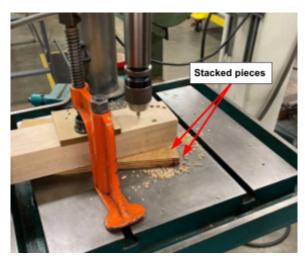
Match drilling example on a drill press. Both parts are identical, and used symmetrically on the device. Multiple clamps keep the parts aligned with each other and secure on the table.
